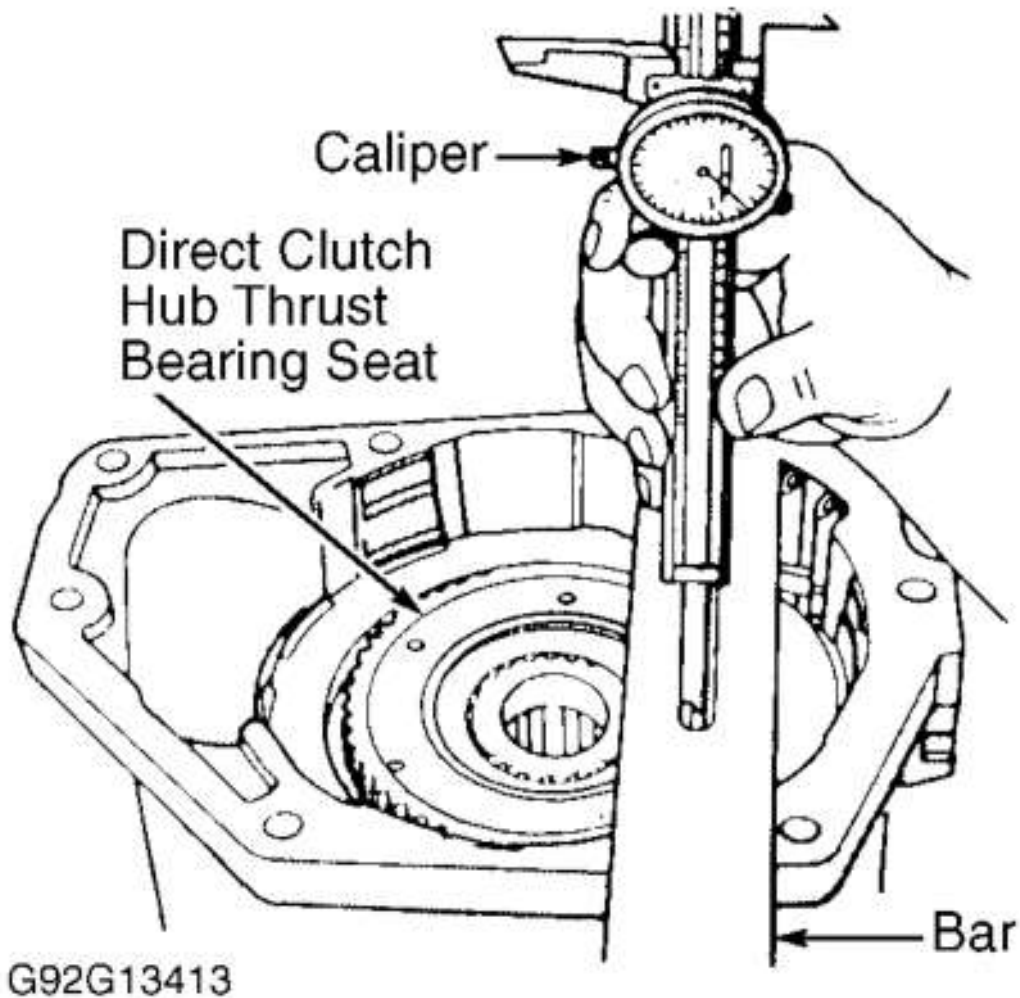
Measuring Distance To Direct Clutch Hub Thrust Bearing Seat
